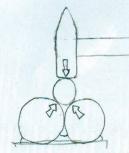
The pipe stake concentrates the force of the blows in three directions.
